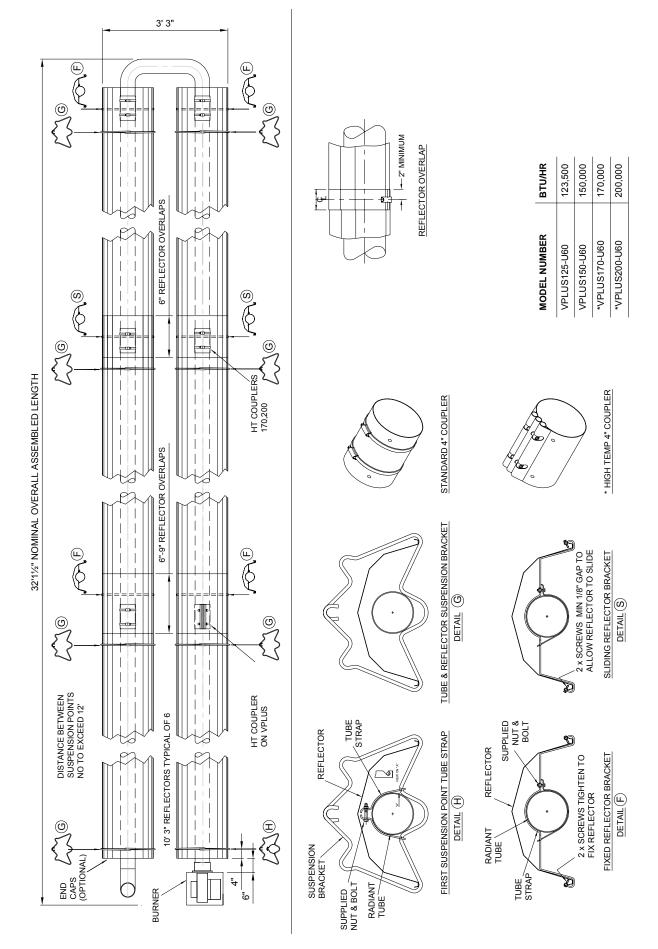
VPLUS Heater Assembly: Model U tube 125-U60, 150-U60, 170-U60 and 200-U60
